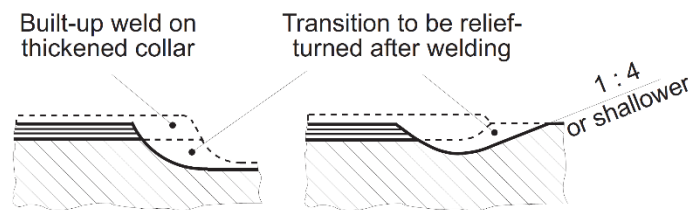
Build-up welds applied to rudderstocks and pintles
